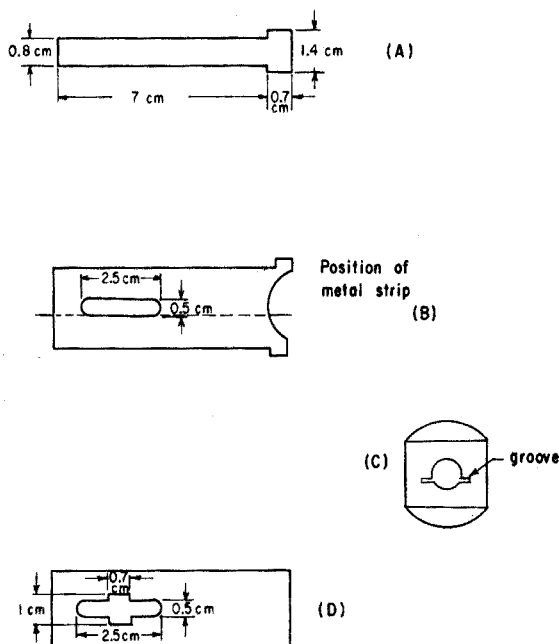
Construction of the cell holder and metal plate. (A) Dimensions of metal plate; (B) side view of cell holder showing position of metal plate; (C) end view of cell holder showing position of groove; (D) top view of cell holder showing the filed aperture.
